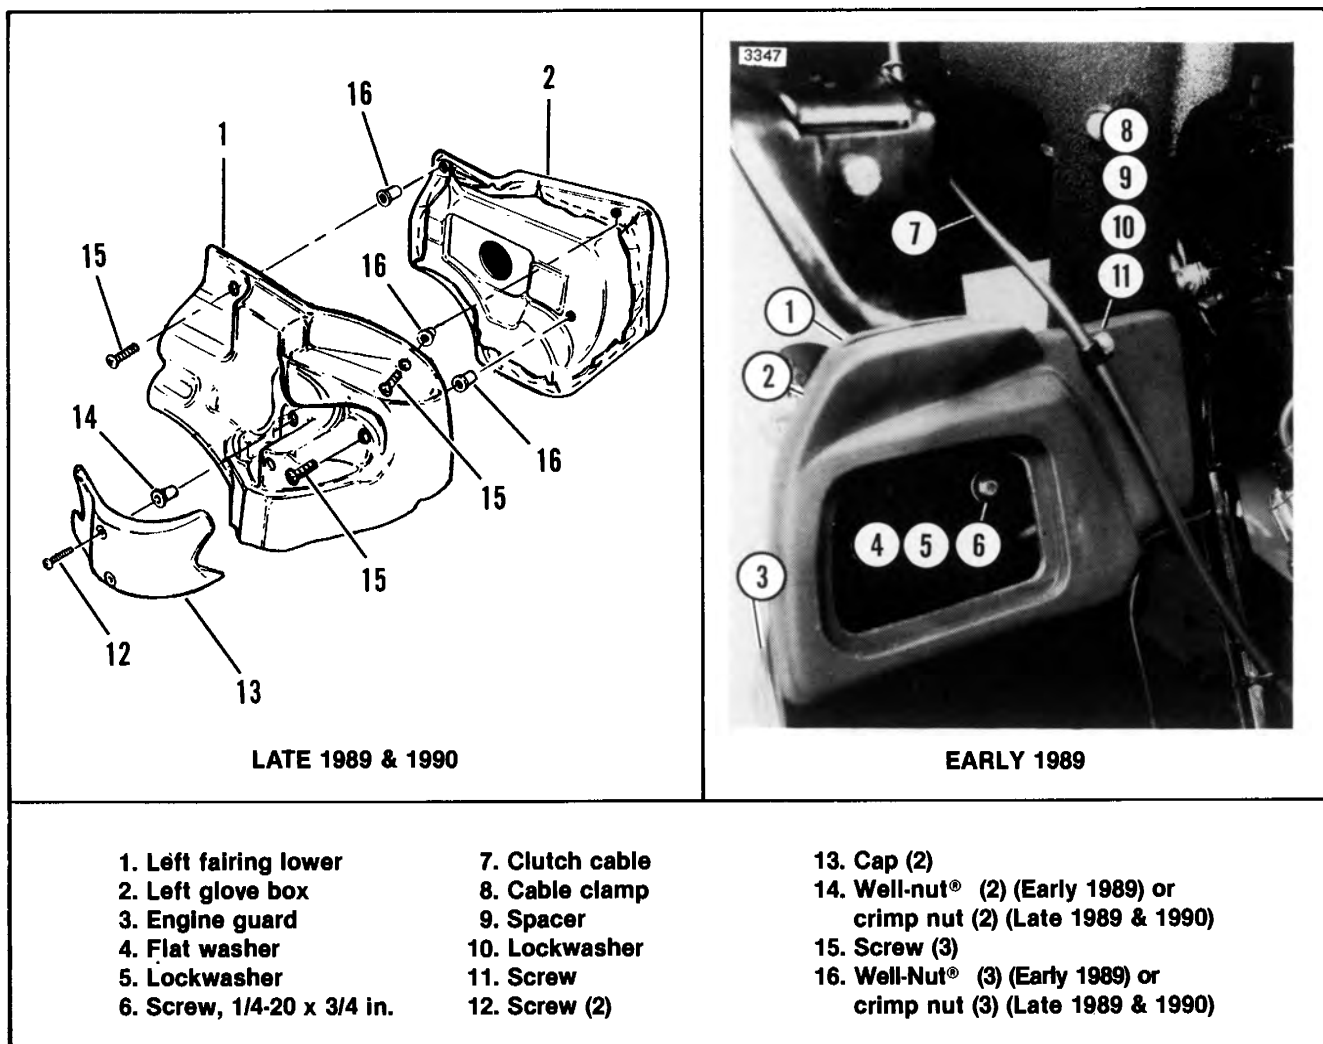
FLTC Ultra Fairing Lower and Glove Box Mounting
